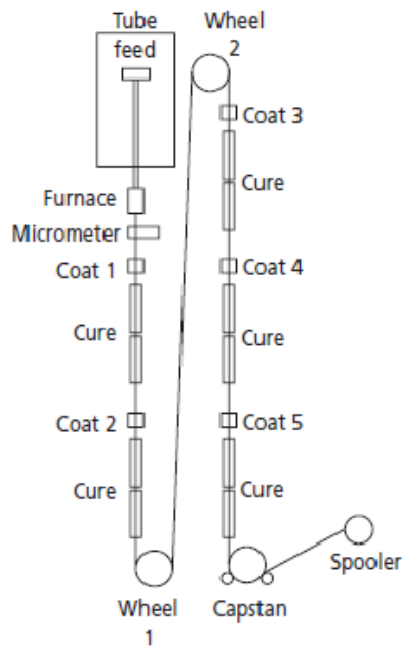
<sup>24</sup>. Possible arrangement of a drawing and coating machine for fused-silica capillary production
